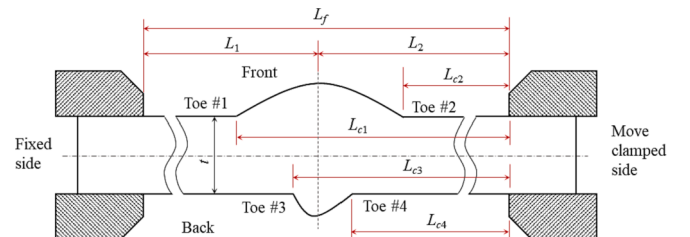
The configuration of a butt-welded joint under clamping condition.
